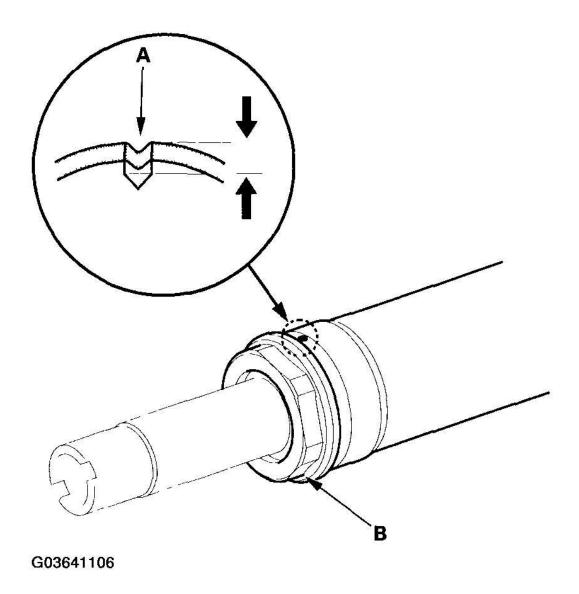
Identifying Staked Point On Cylinder Courtesy of AMERICAN HONDA MOTOR CO., INC.
